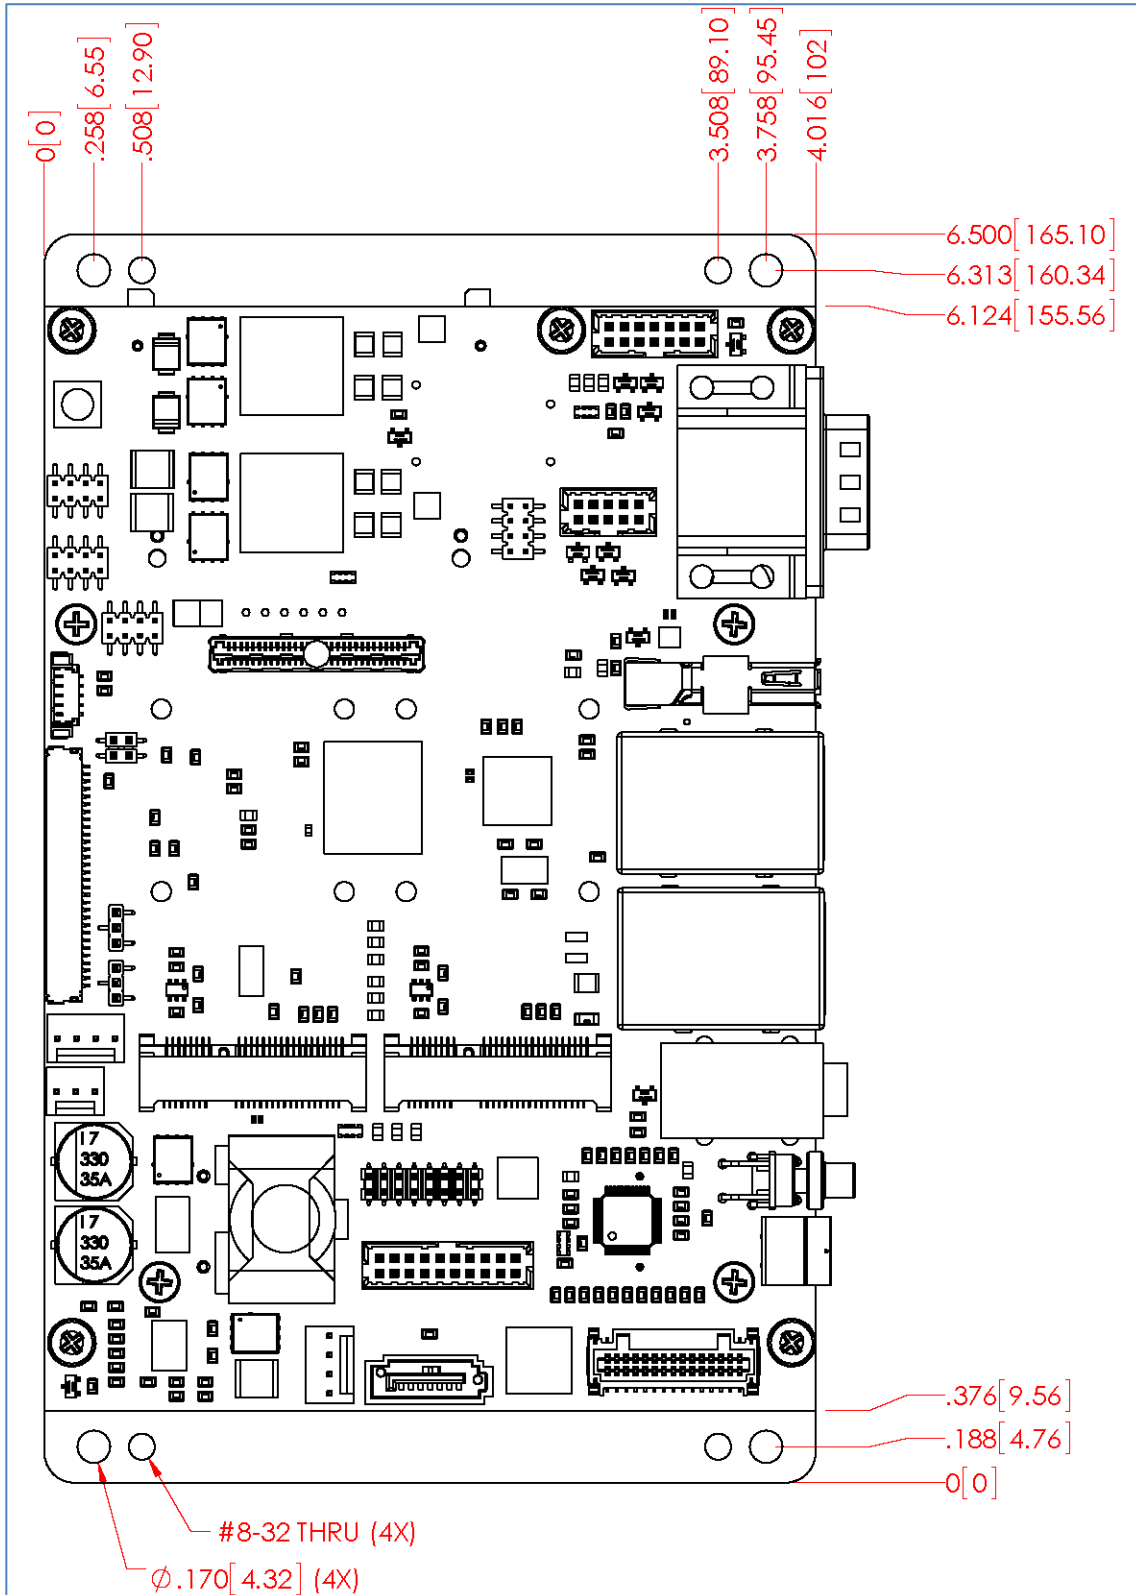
Top Side Component Illustration with Dimensions.
